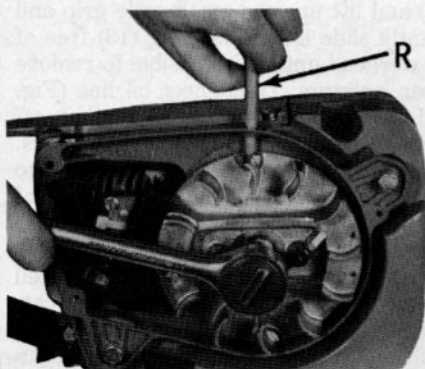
Removal of flywheel or clutch is facilitated by preventing flywheel rotation with a ¼ inch rod stuck through hole in back plate into notch in flywheel.
